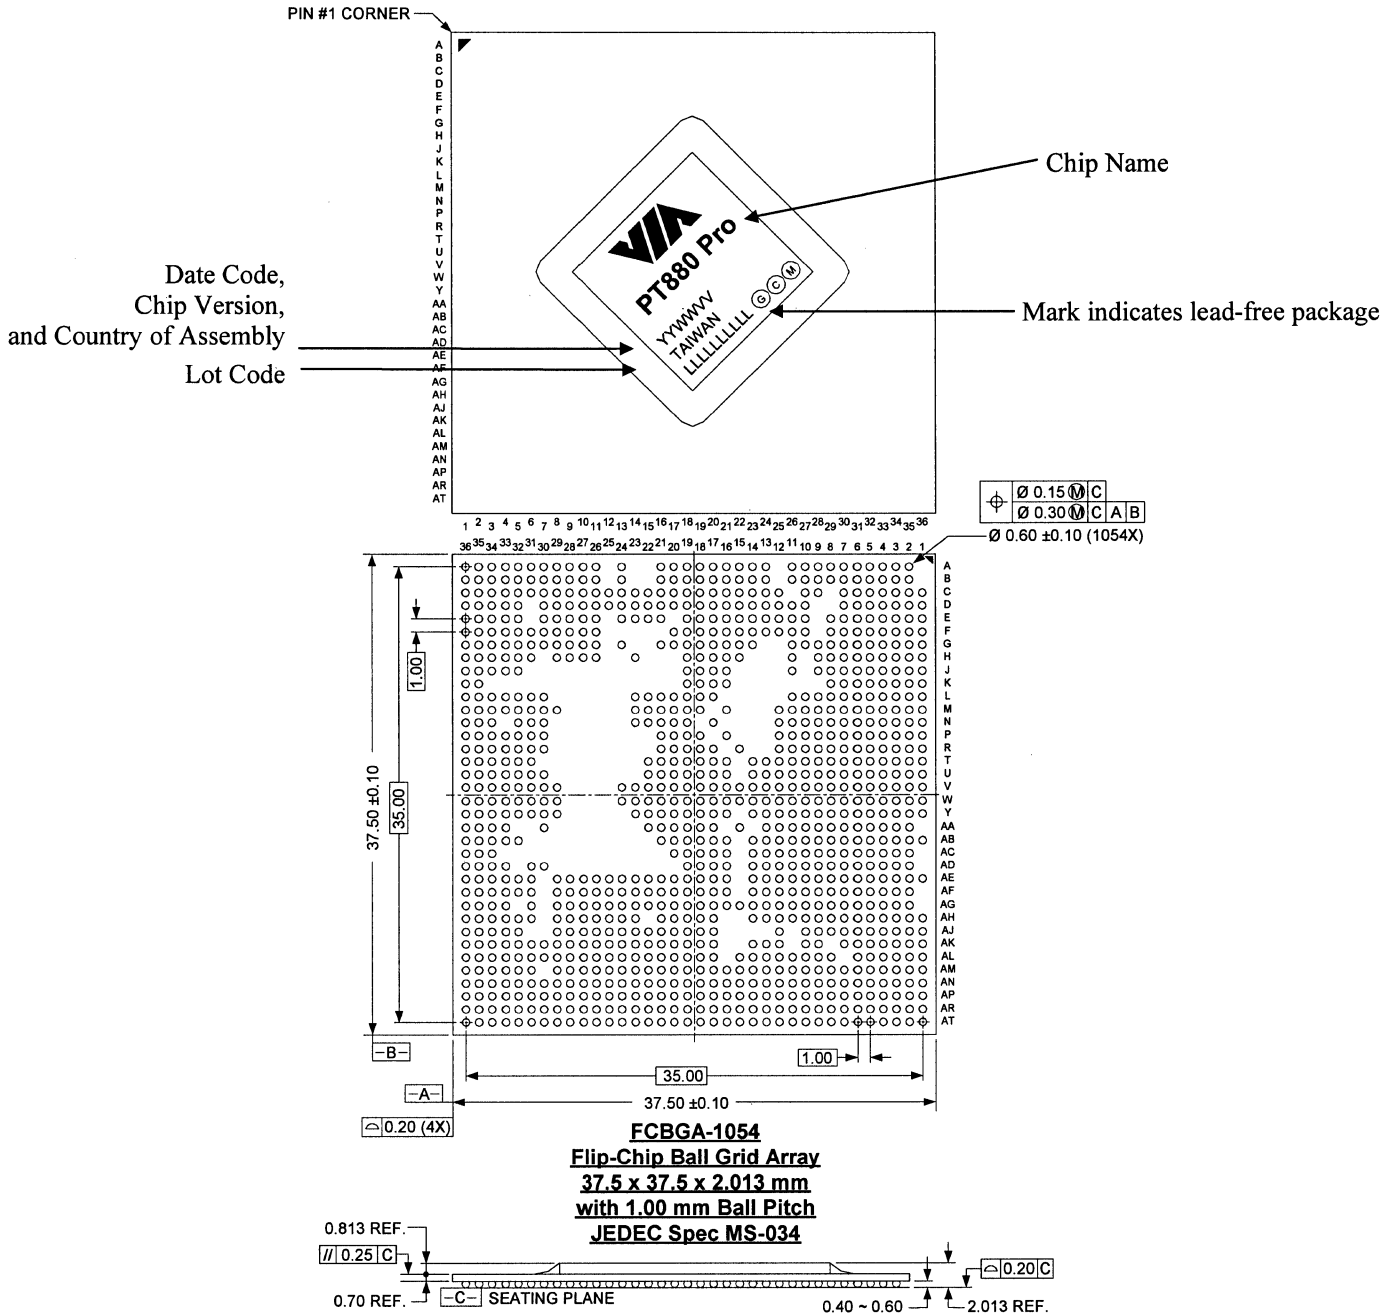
Lead-Free Mechanical Specifications – FCBGA-1054 Flip Chip Ball Grid Array Package
